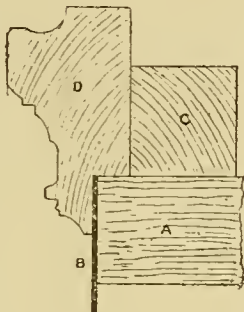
MODE OF FIXING MOULDING. — A, Upper Shelf; B, Leather Cloth; C, Fillet on Shelf; D, Moulding.
